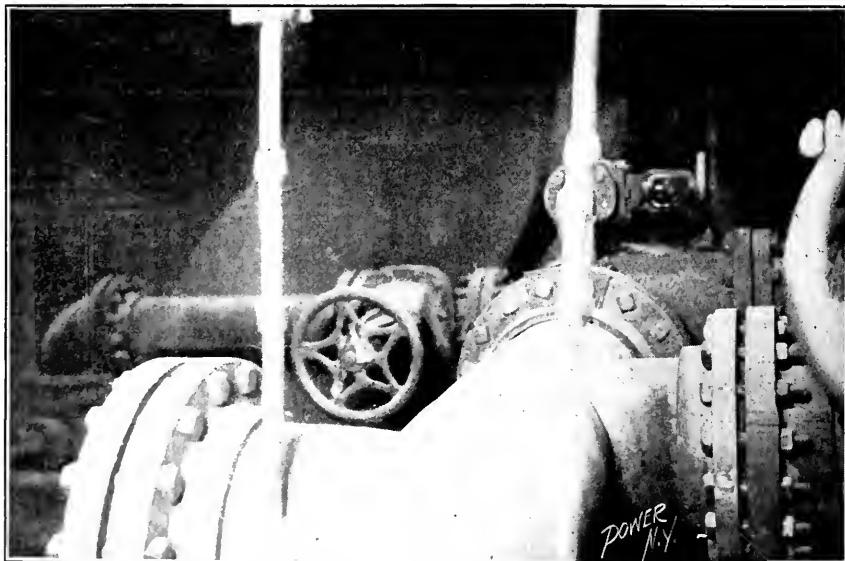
ANOTHER SAMPLE OF NOZZLES WELDED TO HEADER
